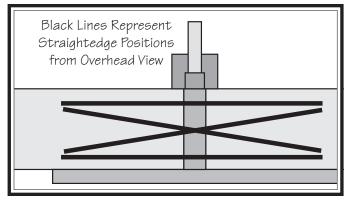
Straightedge positions for checking infeed/outfeed table parallelism.
